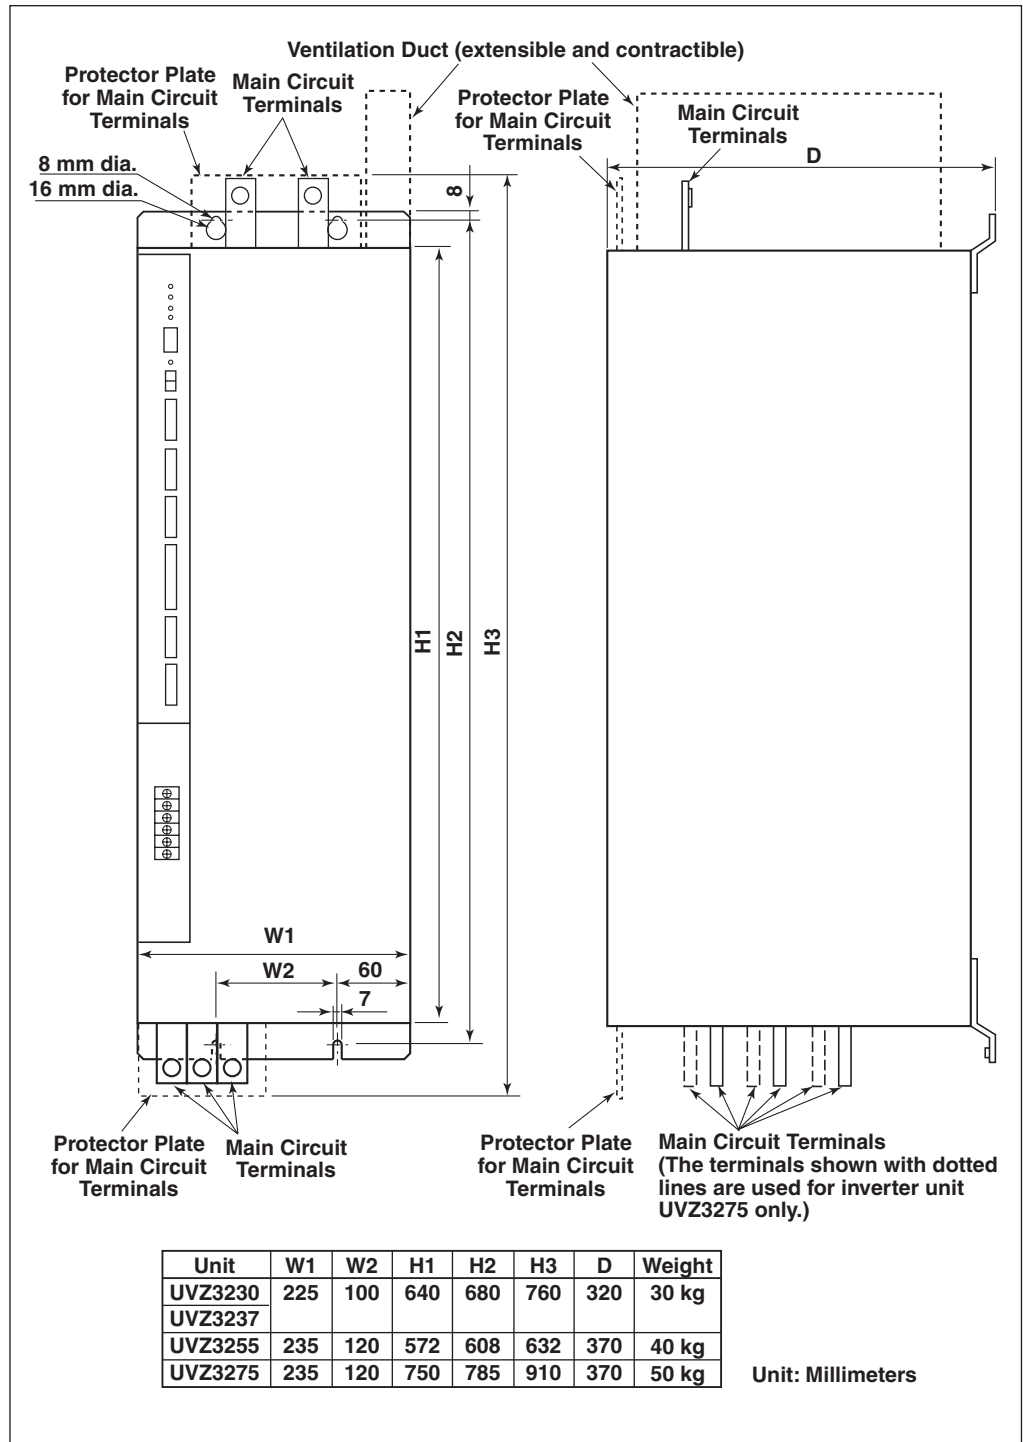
Dimensions of Separate Type Inverter Units UVZ3230 to UVZ3275
